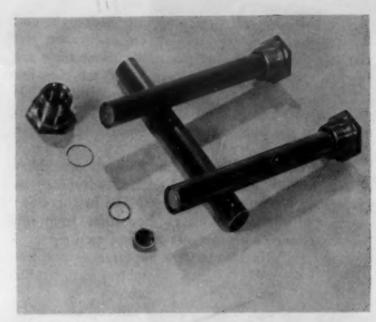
In the tail plug assembly, a steel screw machine part, a stamping and a section of tubing are assembled with two copper wire rings and then brazed.
